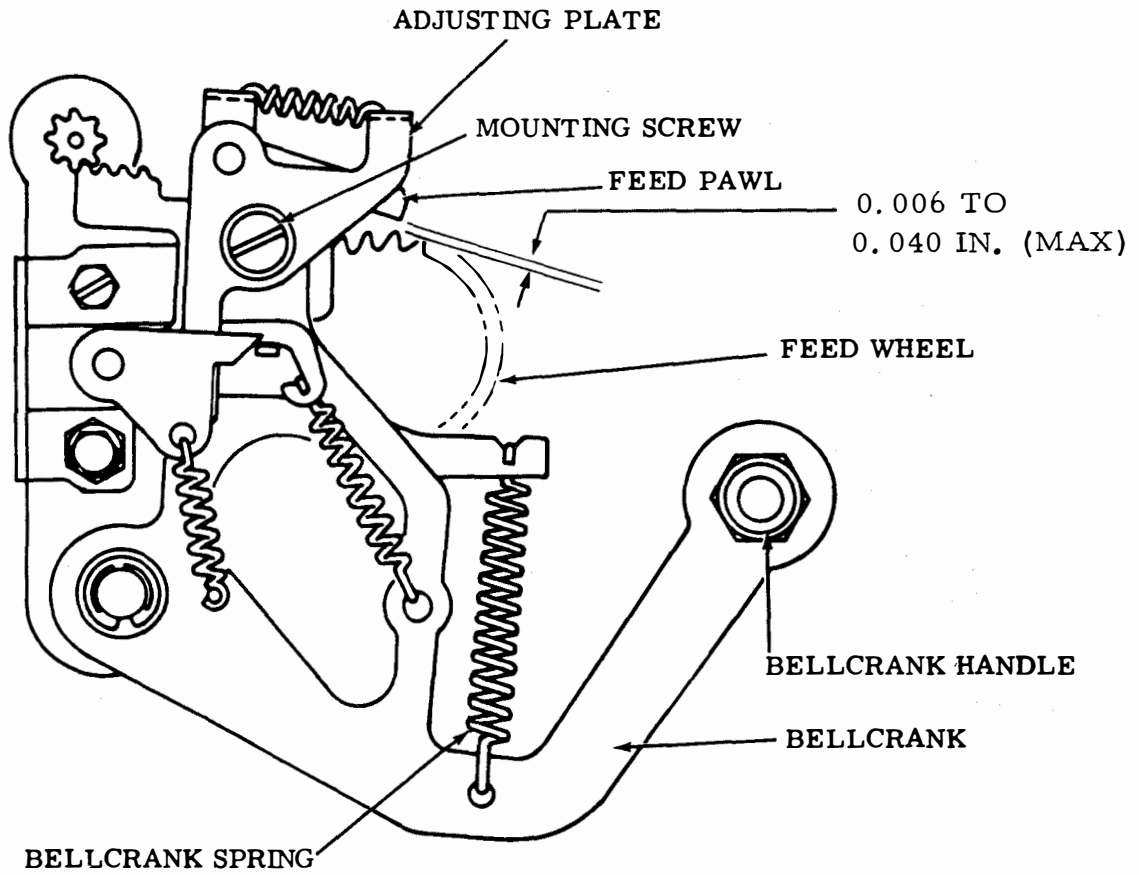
Feed Pawl Adjusting Plate, Reperforator
